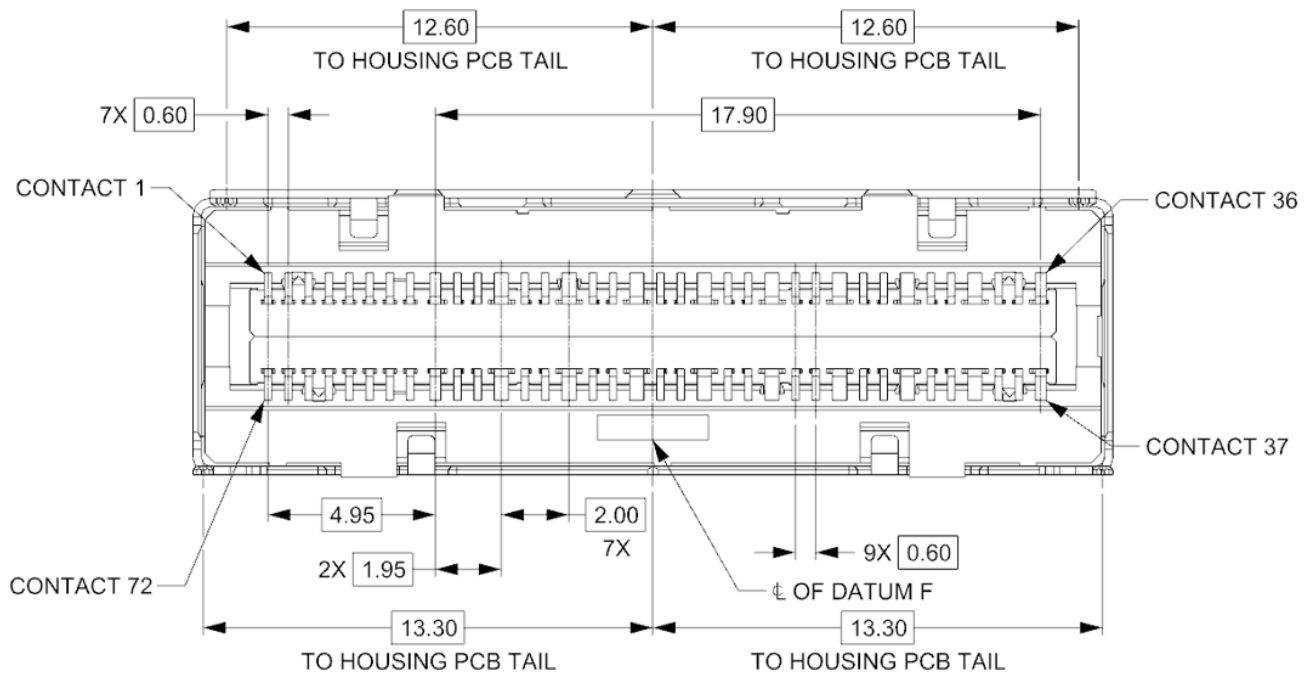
Bottom View of Fixed-Side Connector (2 of 2)
